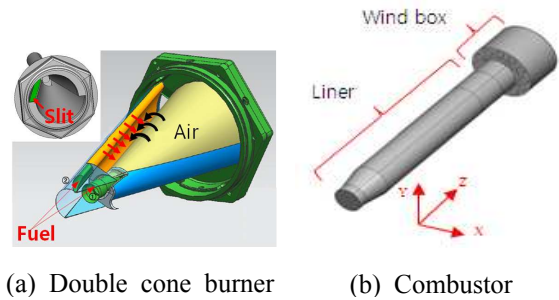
Three dimensional geometries of double cone burner and a combustor
